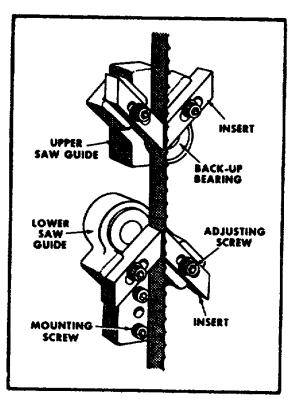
Completely assembled upper and lower inserttype saw guides for the Model 1612-0.
